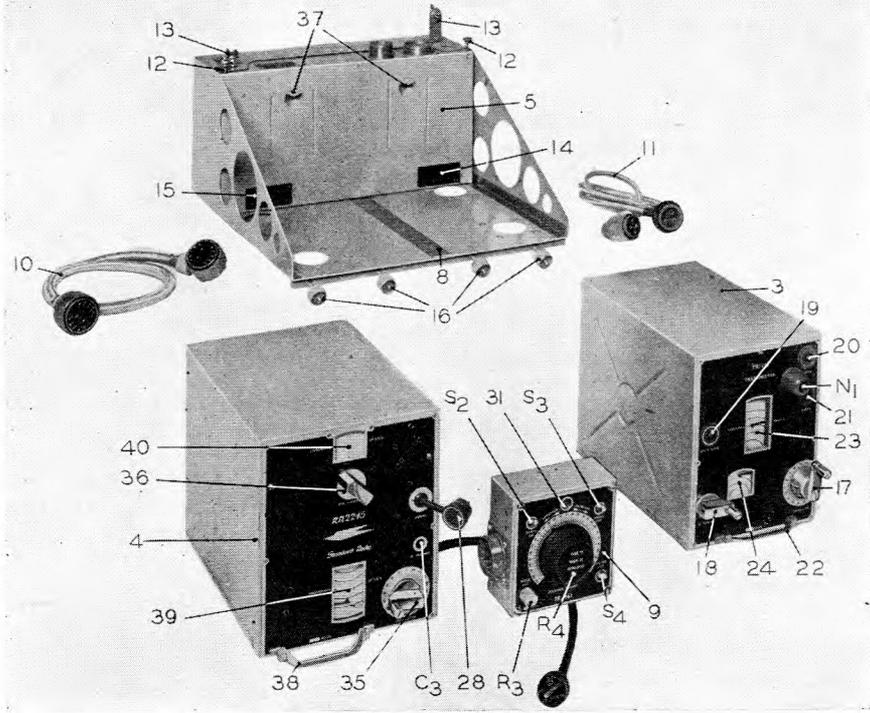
DISSEMBLED VIEW OF T.R.1161 EQUIPMENT
